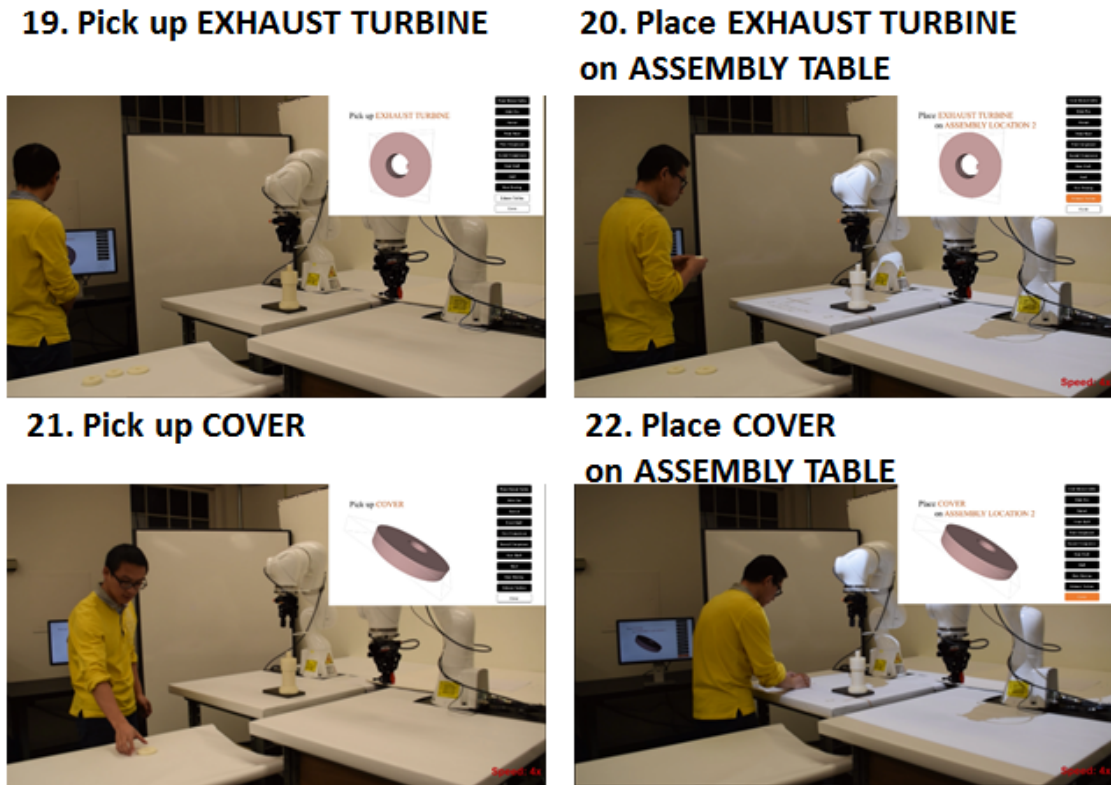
Generation of instructions for chassis assembly (19-22)
